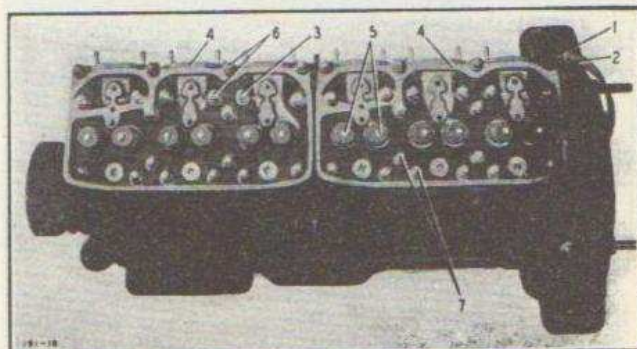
View of Cylinder Heads Stripped of Valve Mechanism
